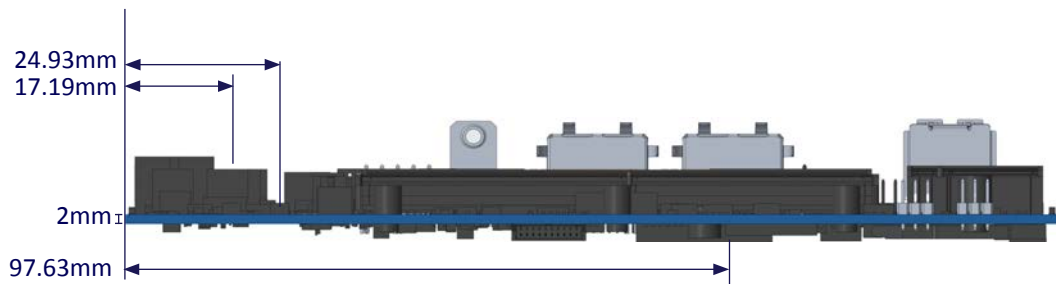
External I/O dimensions of the VIA SOMDB7 carrier board (front coastline I/O)
